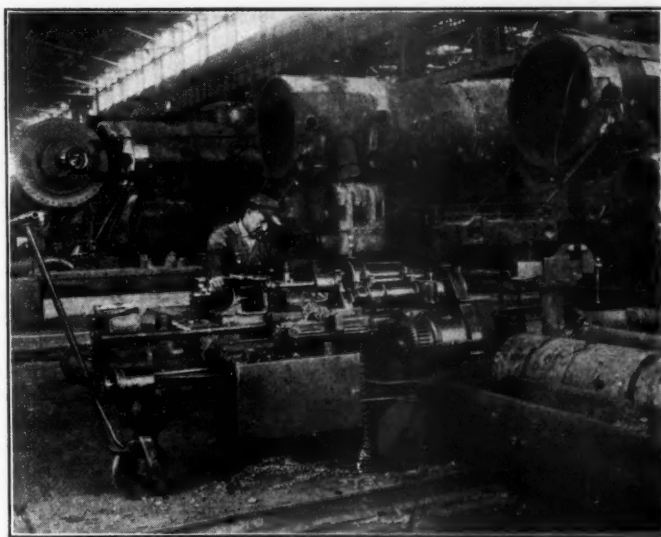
Portable Engine Lathe Used in Fitting Frame Bolts
